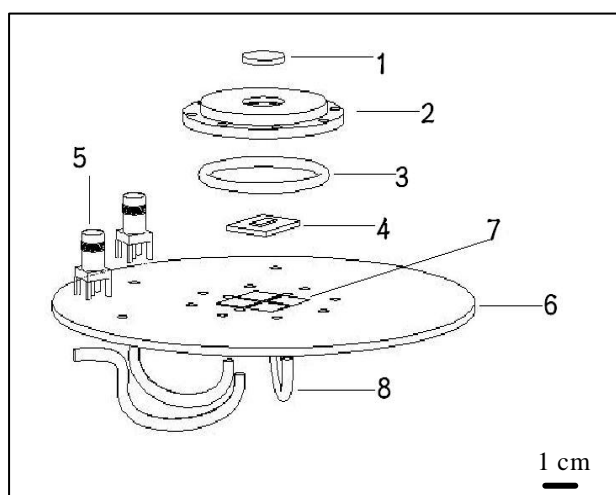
The components of the device. 1. IR window, 2. chamber, 3. O-ring, 4. Sample, 5. SMA connector, 6. PCB, 7. bonding pad, 8. pipe.
